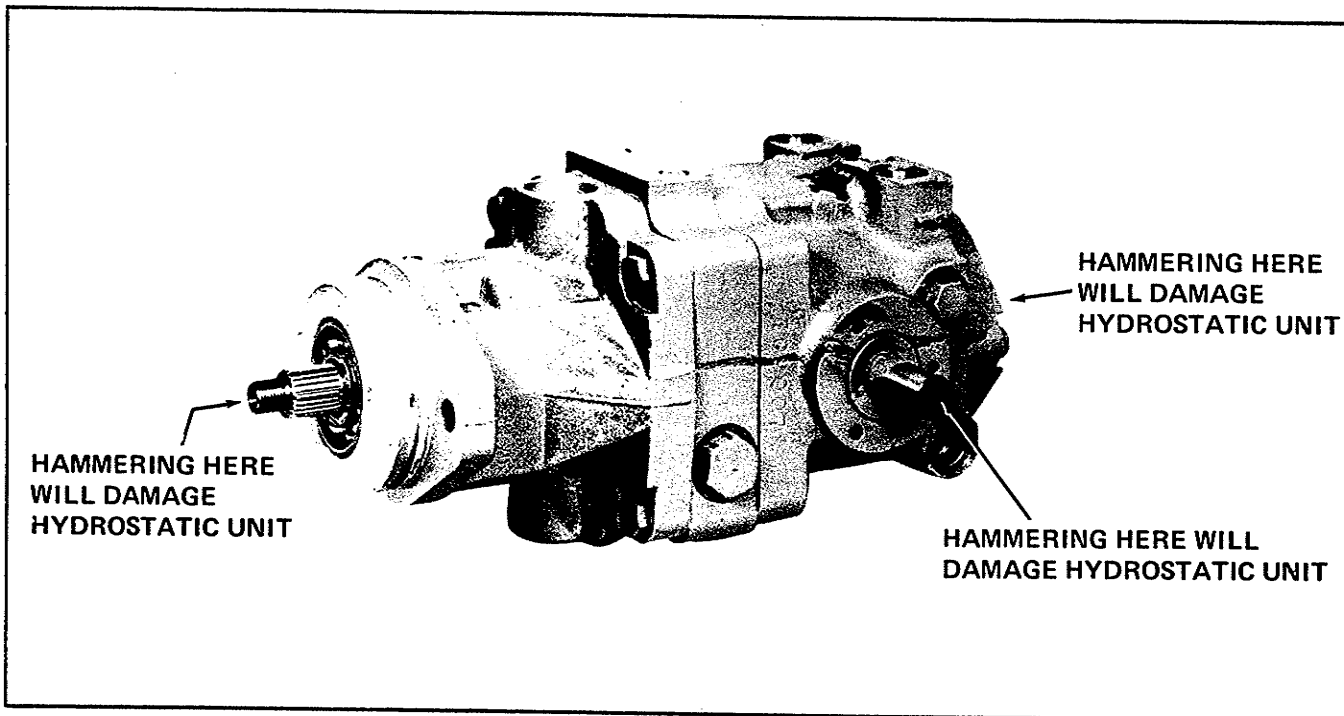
Do Not Drive On Input, Output, or Control Shafts
